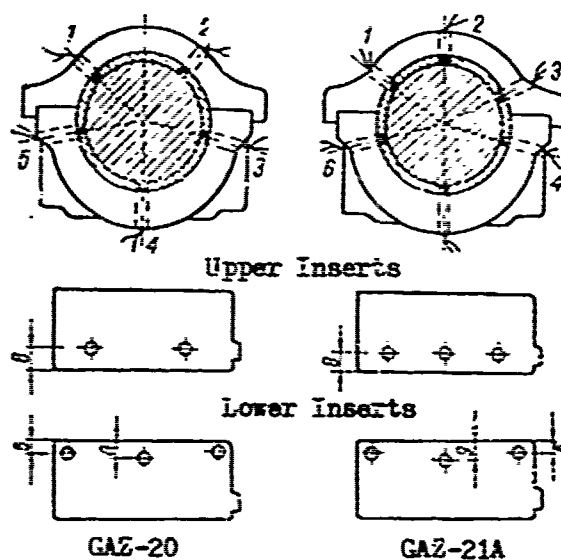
Arrangement of Thermocouples for Measuring Temperature of Main Crankshaft Bearing Inserts in GAZ-20 and GAZ-21A Engines.
